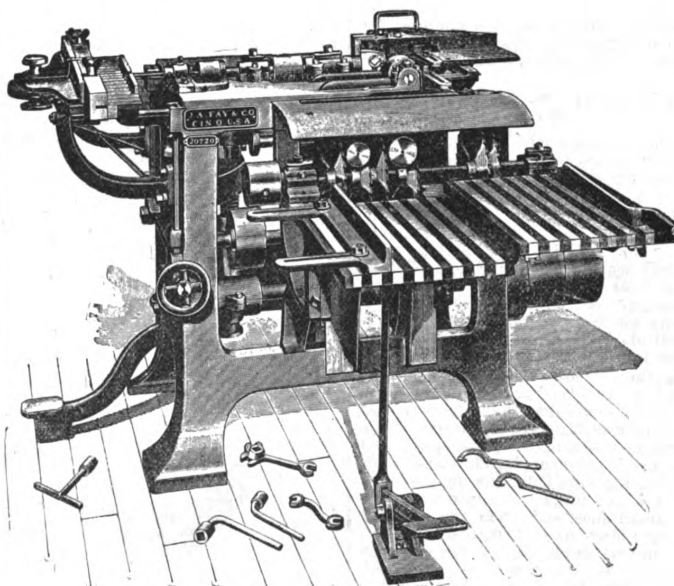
Sash, Door and Blind Mortising and Relishing Machine.
